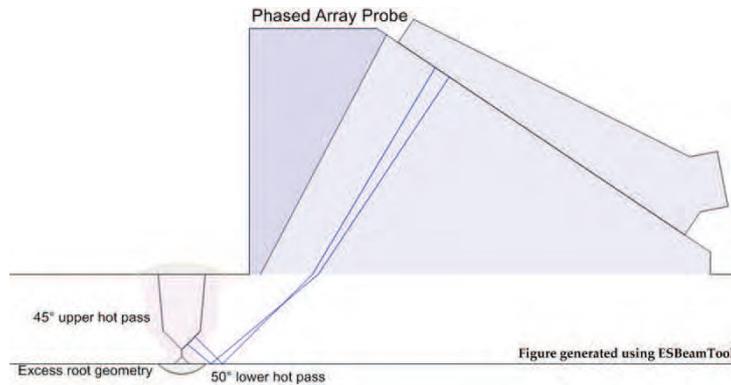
Accommodating root geometry for the lower hot pass zone
